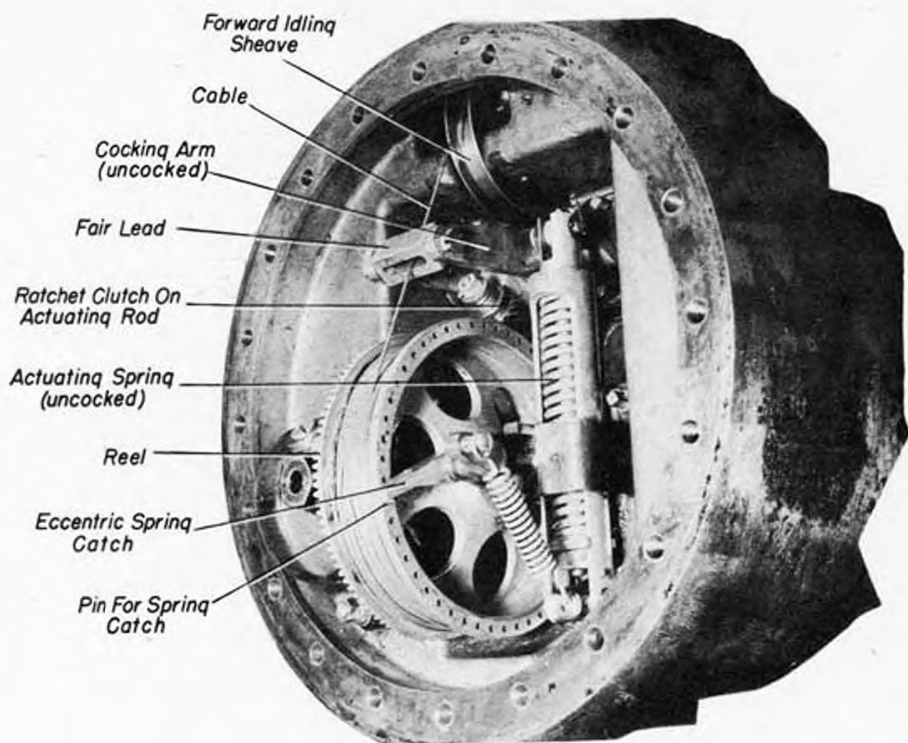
Type 3 Warhead (Nose) - Mechanism Uncocked
